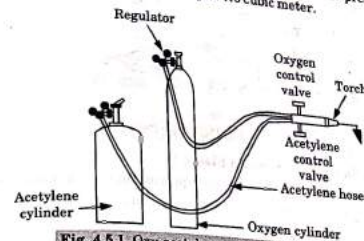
Oxy-acetylene welding equipment.
